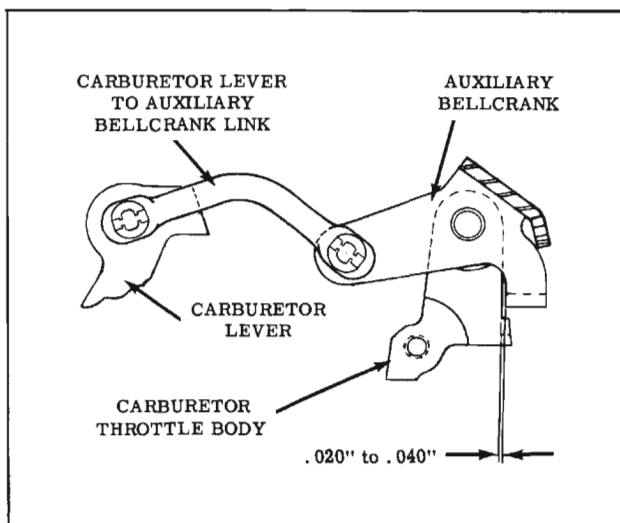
Carburetor Lever to Auxiliary Bellcrank Adjustment (4 Barrel)
